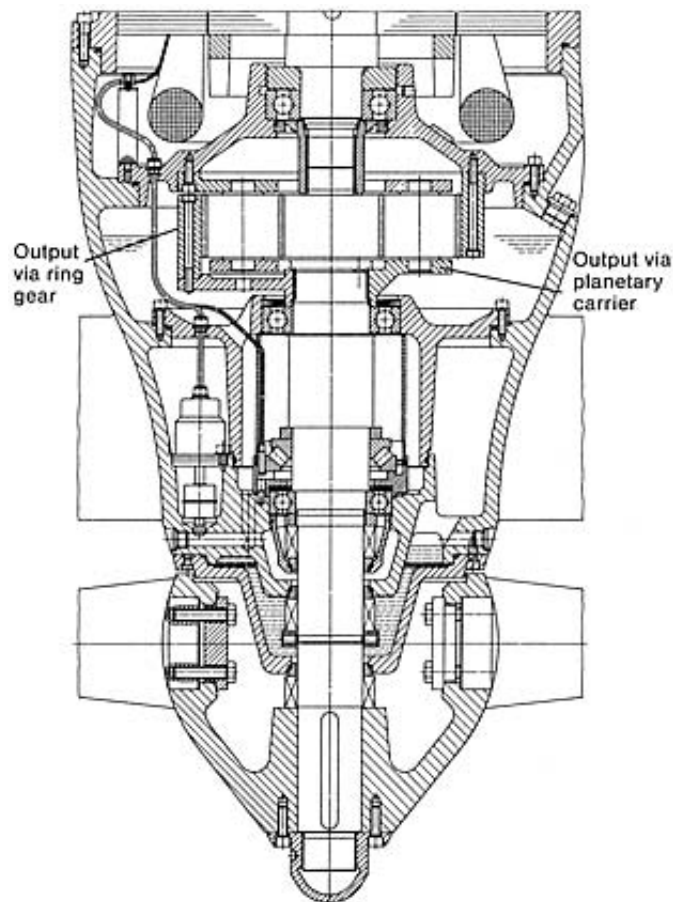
Submersible motor propeller pump with integrated planetary gear. The two sides of the figure show different gear designs
